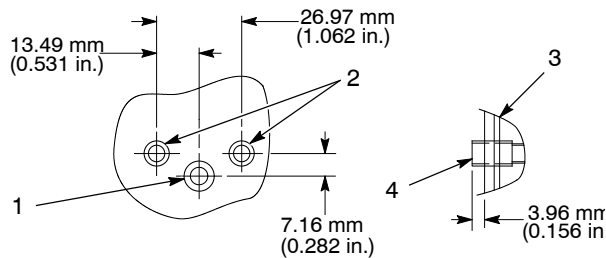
Mounting Dimensions for Manifold Mount Dispensing Valve
